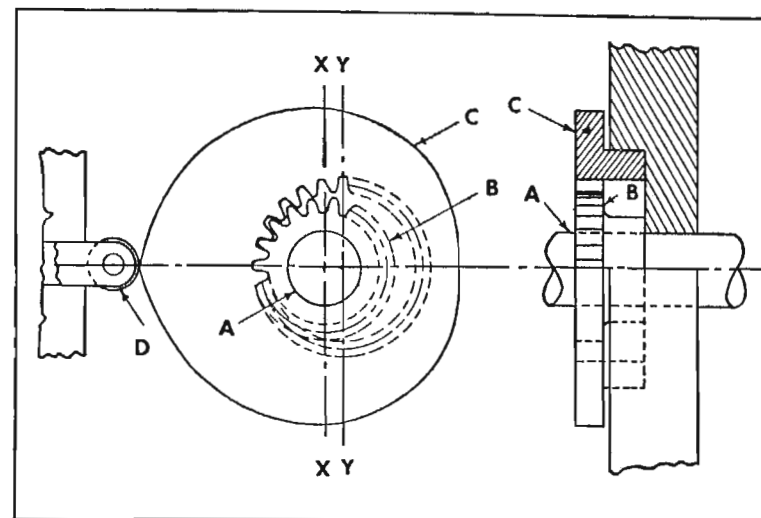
Internal Spur Gear Teeth Cut in Cam Permits Reduction in Cam Speed without Changing Camshaft Speeds.
